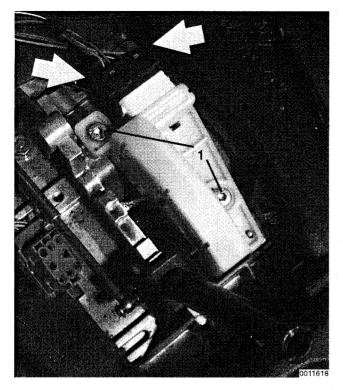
Transmission gear-position/neutral safety switch under center console. Squeeze connector tabs (arrows) to disengage harness connector.
